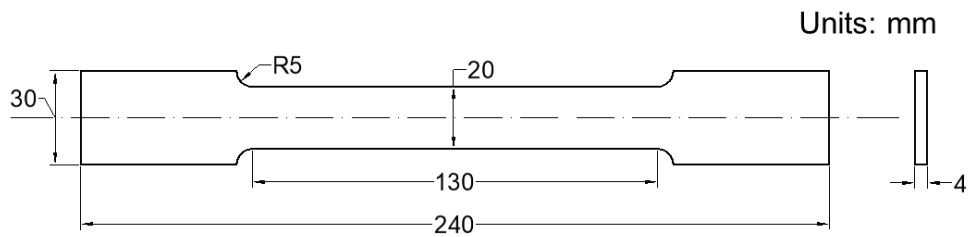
Geometry and dimensions (mm) of the flat tensile specimens according to ISO 6892-1 [21]
